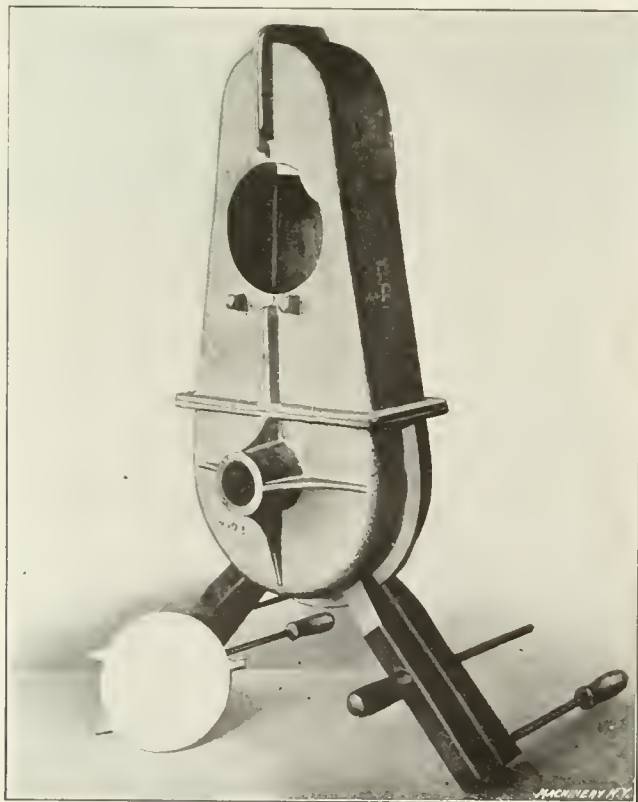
Aluminum Case, the Joints of which are finished on a Disk Grinder in about Twenty Minutes
